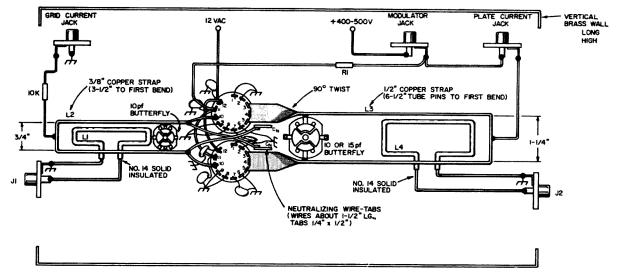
Layout, coils and details of the two meter Compactron final. This drawing is one-third size.
